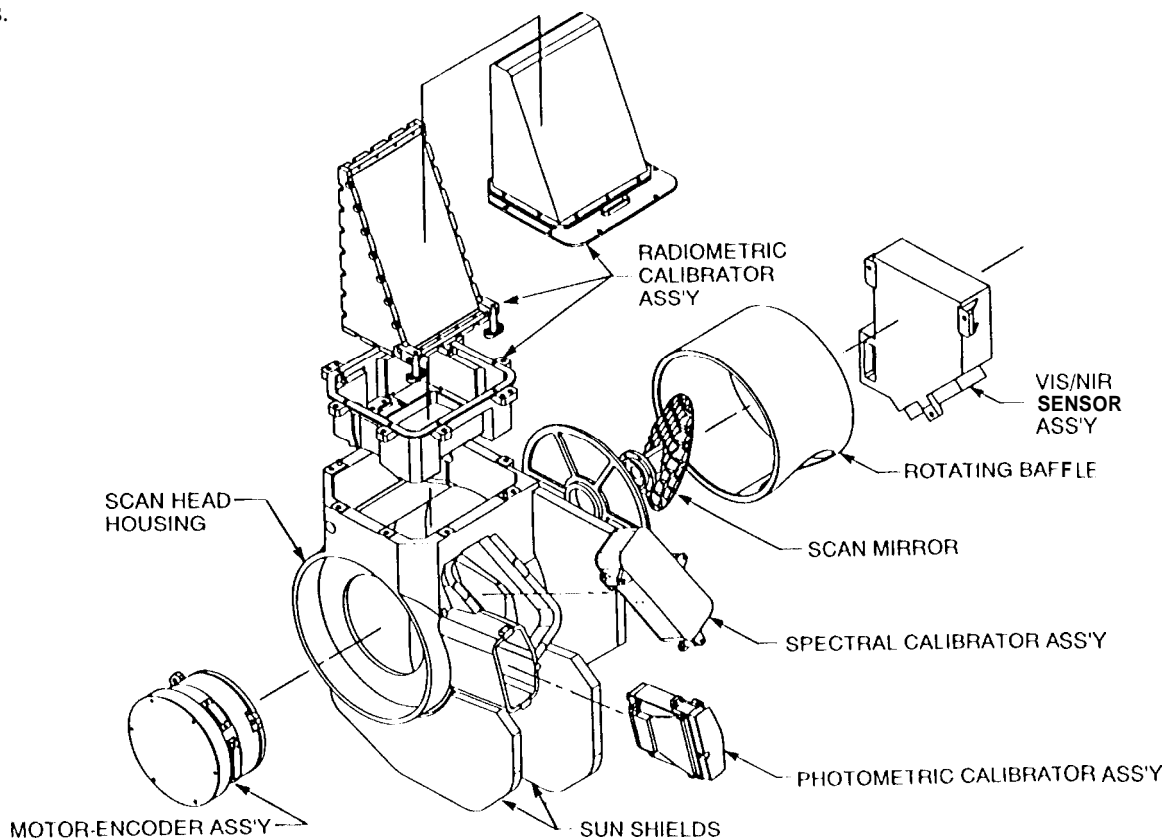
Exploded view of the AIRS scan head assembly. The scan mirror provides the cross-track spatial coverage, and generates a radiometric, photometric and space-view calibration every 2.67 seconds.
